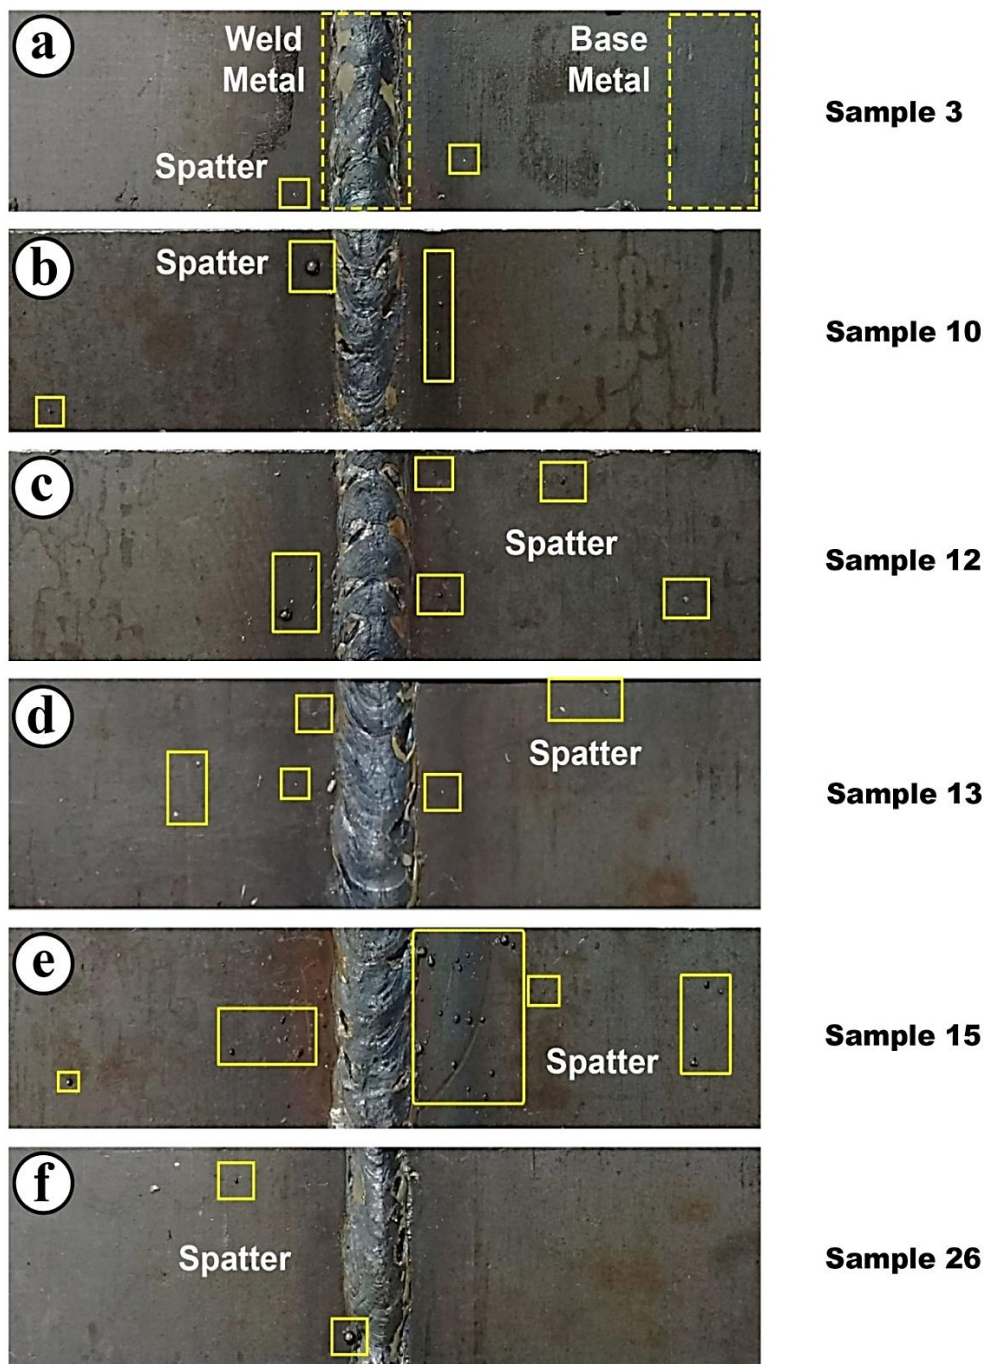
Top surface of welded joints in C-80 steel.
